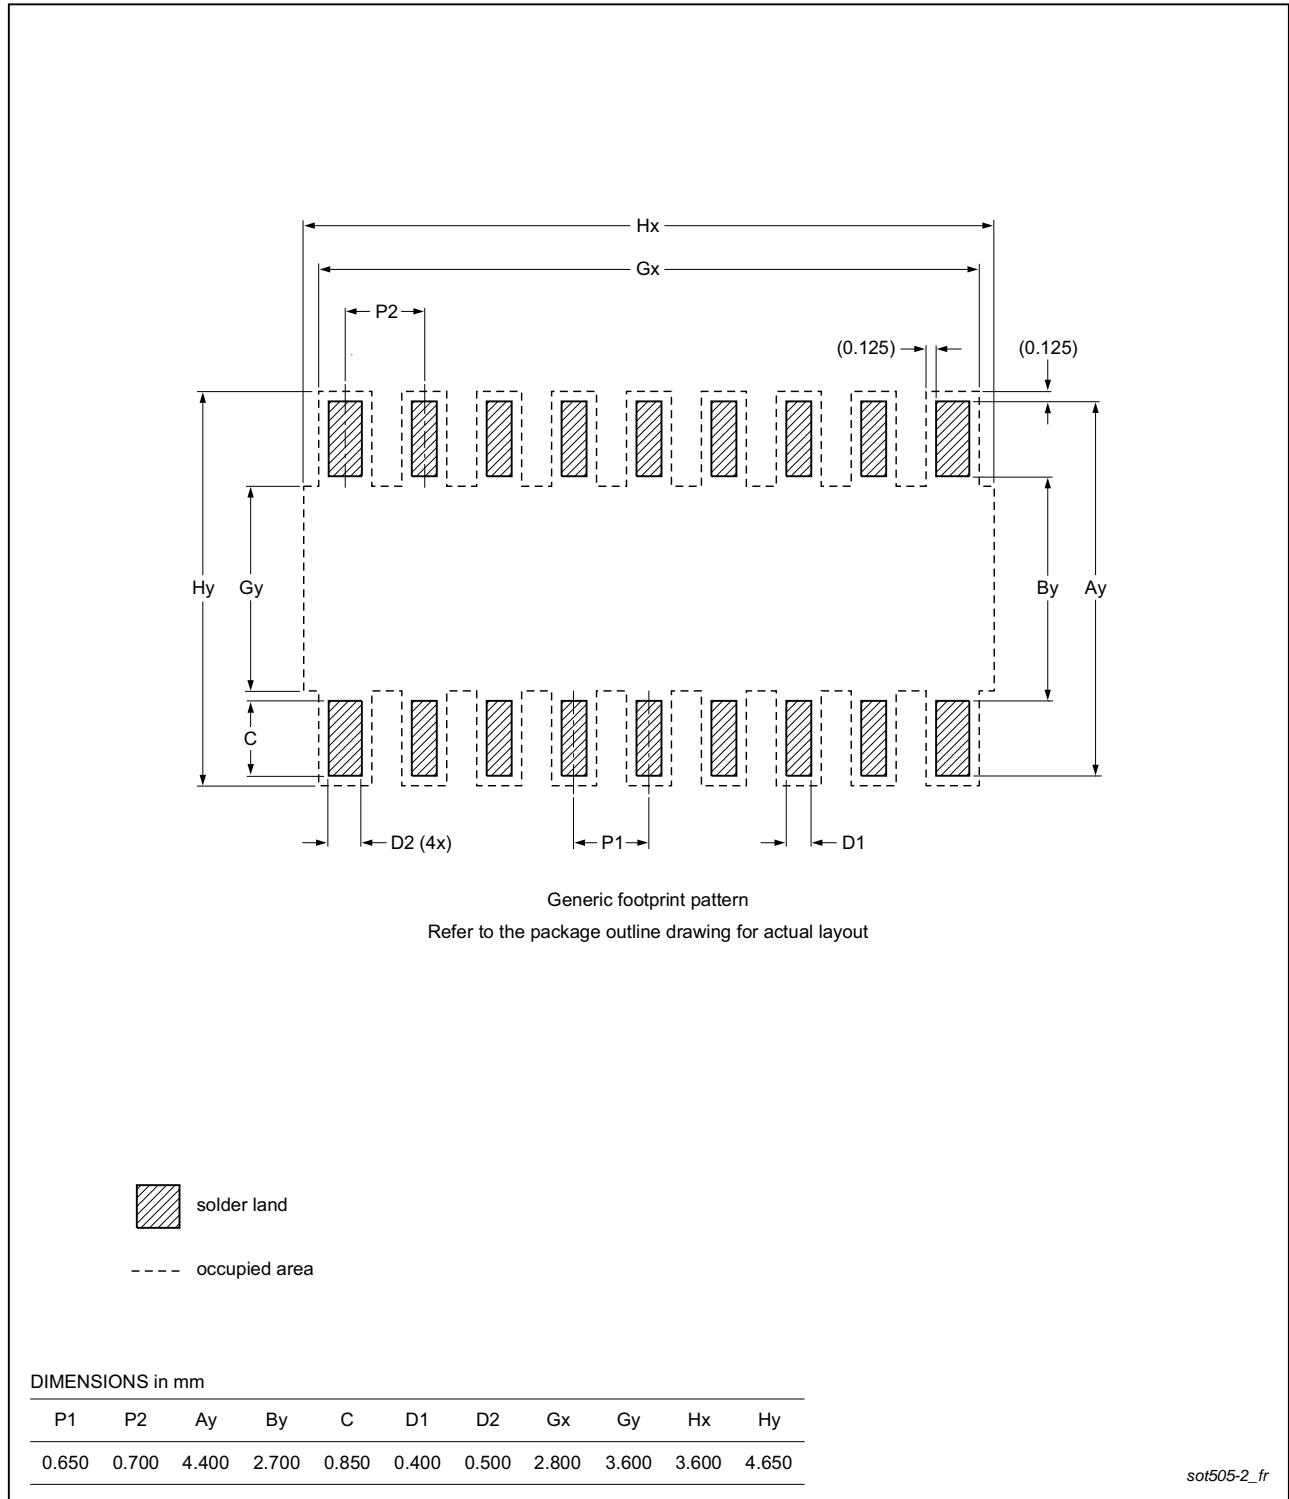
PCB footprint for SOT505-2 (TSSOP8); reflow soldering
